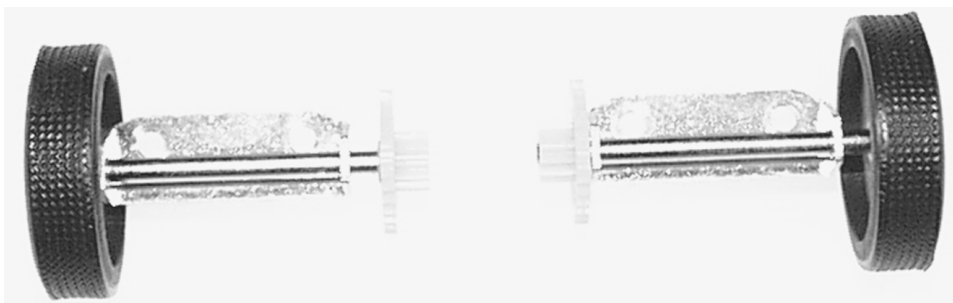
Wheels pressed on wheel brackets with axles/gears.
